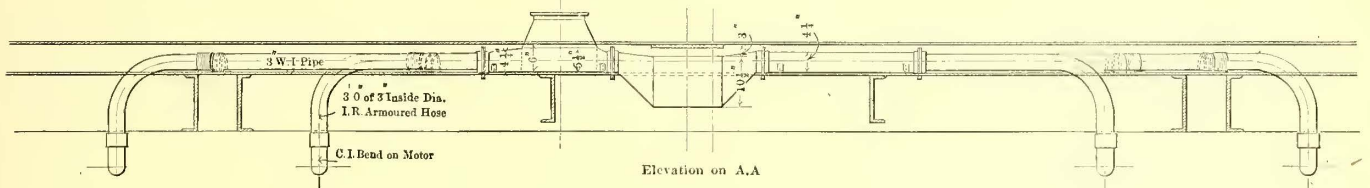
DETAILS OF THE VENTILATING AIR DUCTS
